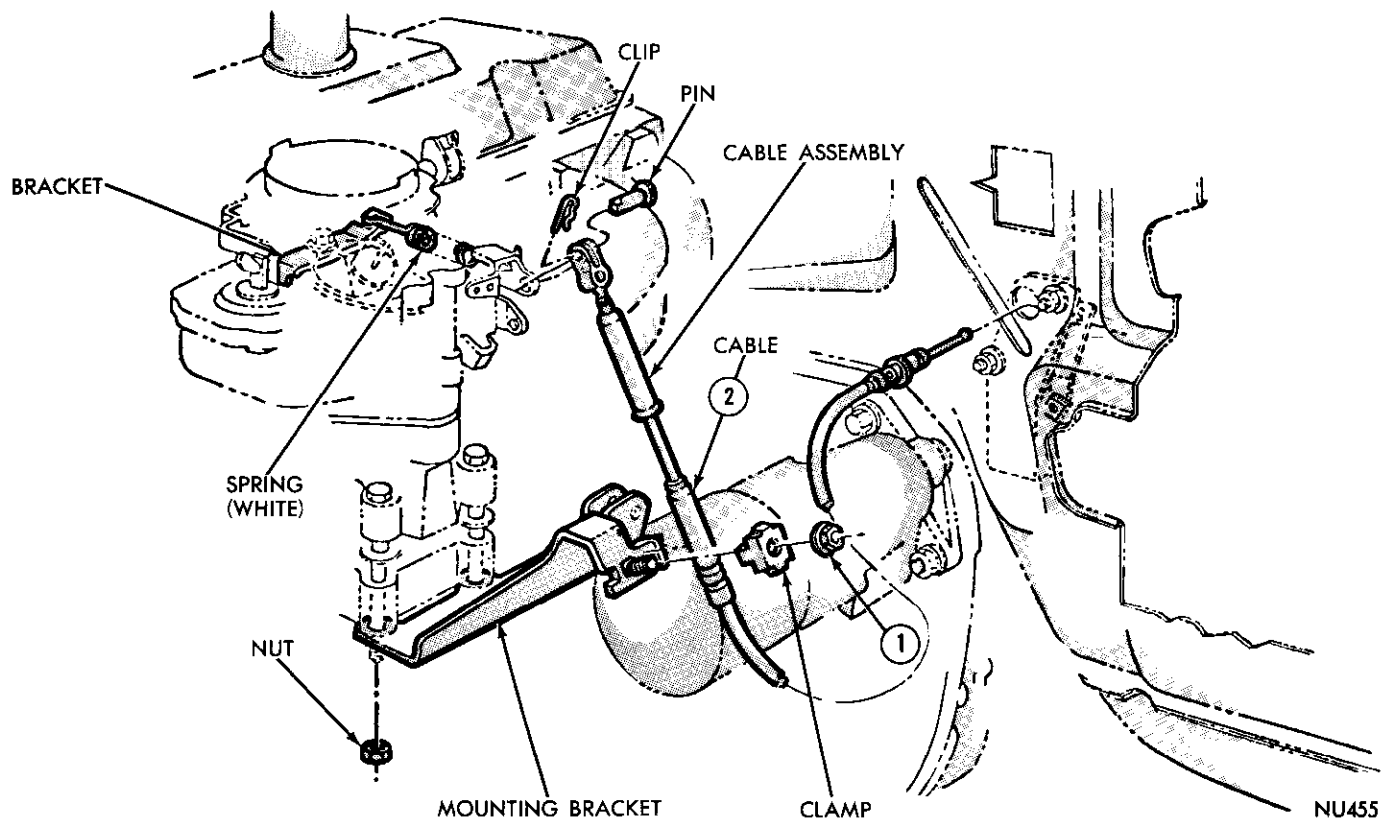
Throttle Linkage Adjustment (6 Cylinder Engines)
